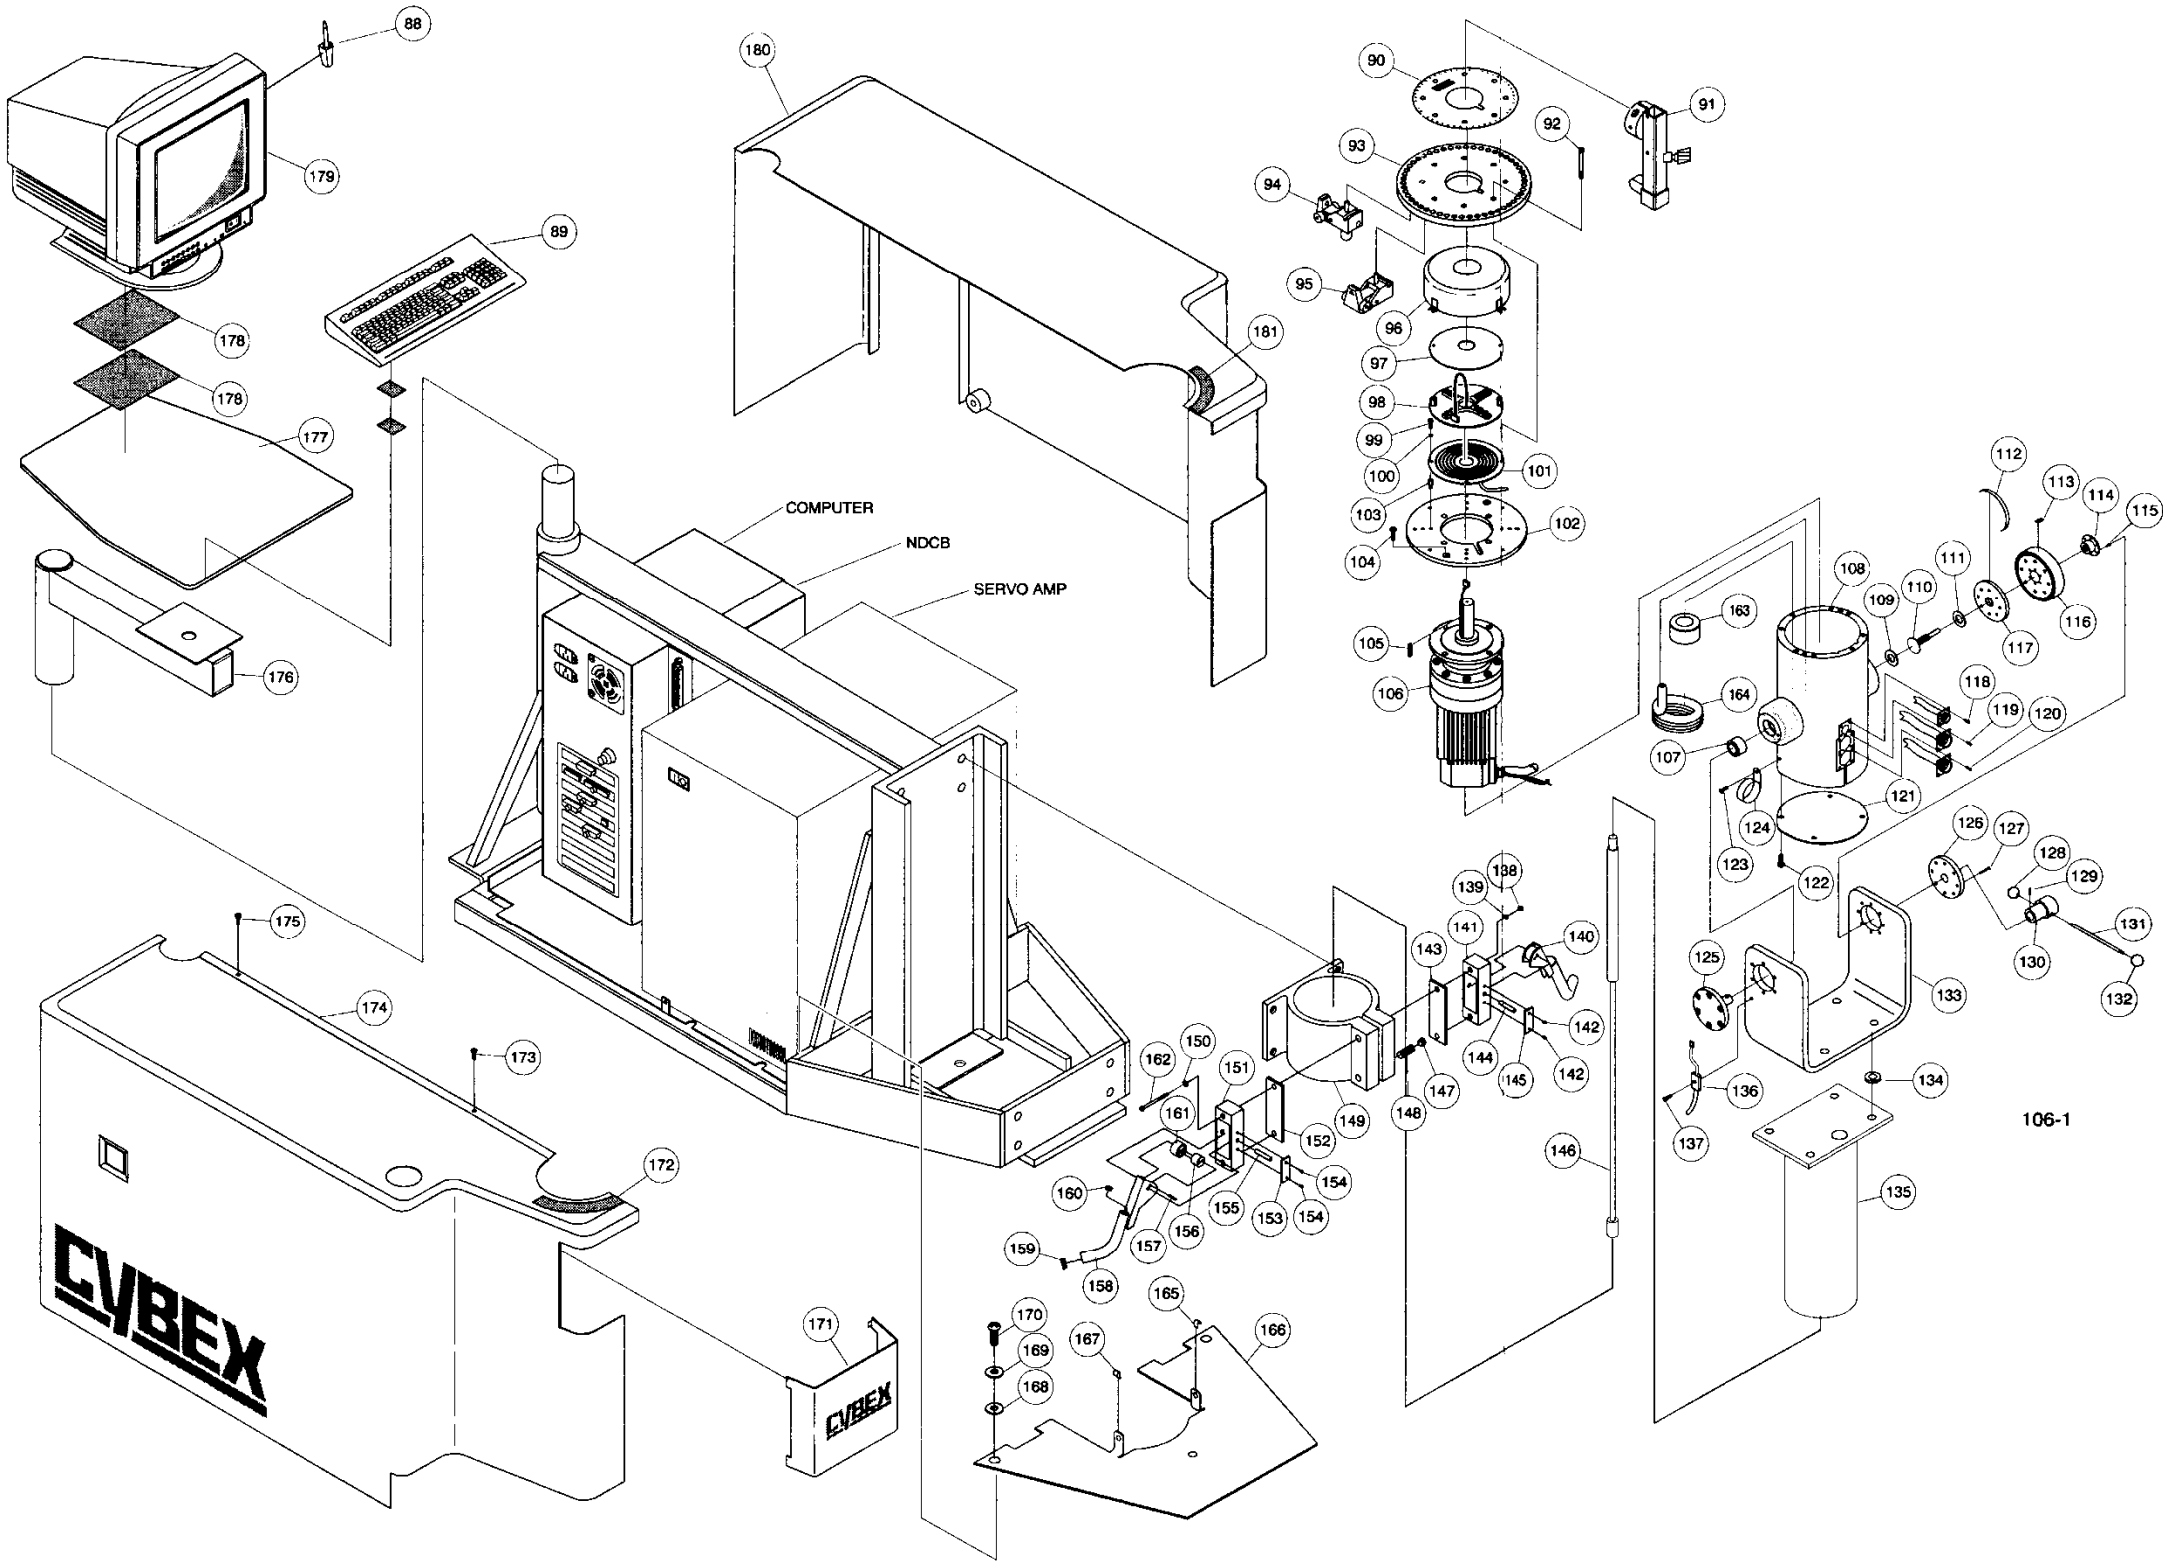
Electronics Module Exploded View (Sheet 2)
